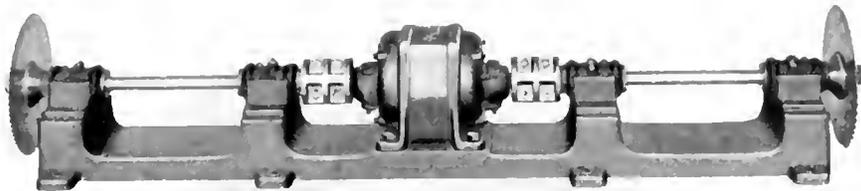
1 H.P. Induction Motor Direct Coupled to Two 12 in. Cross Cut Trim Saws
